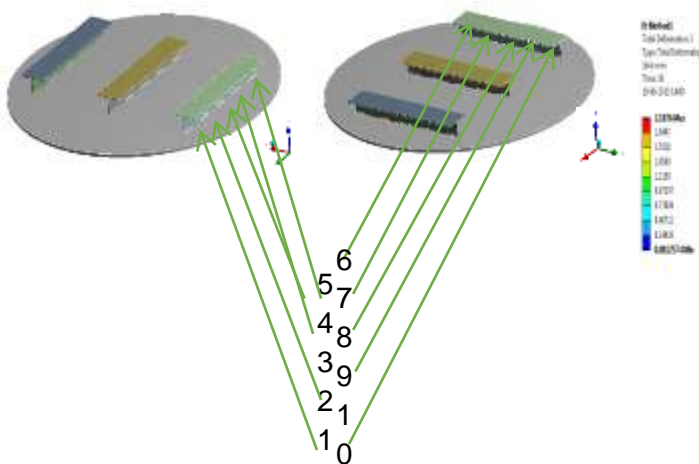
Linear Zig-Zag Welding sequence(WS-1)
